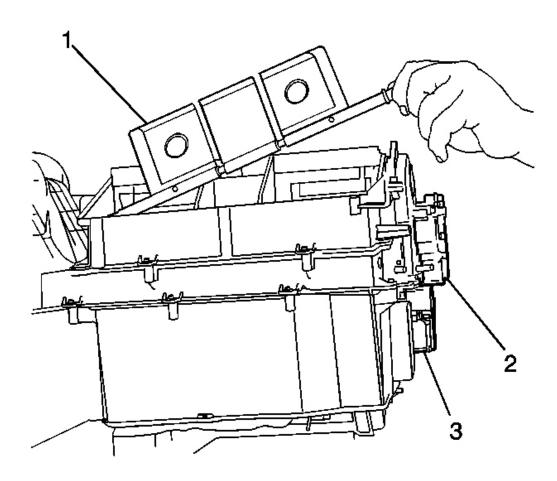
View Of Defroster Door Courtesy of GENERAL MOTORS CORP.
